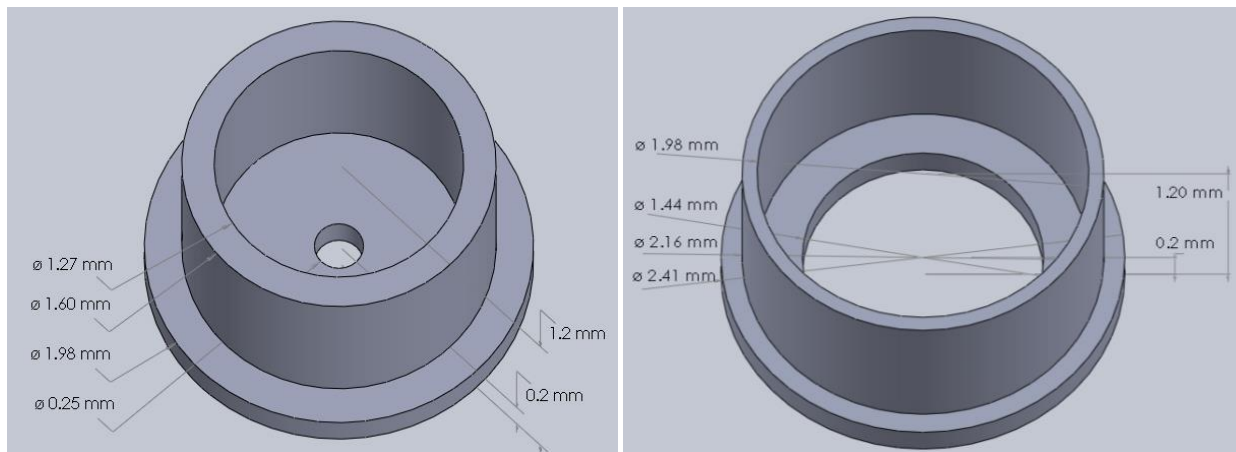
Left: Laser endcap with dimensions. Right: Camera endcap with dimensions. Dimensions are shown in millimeters.
